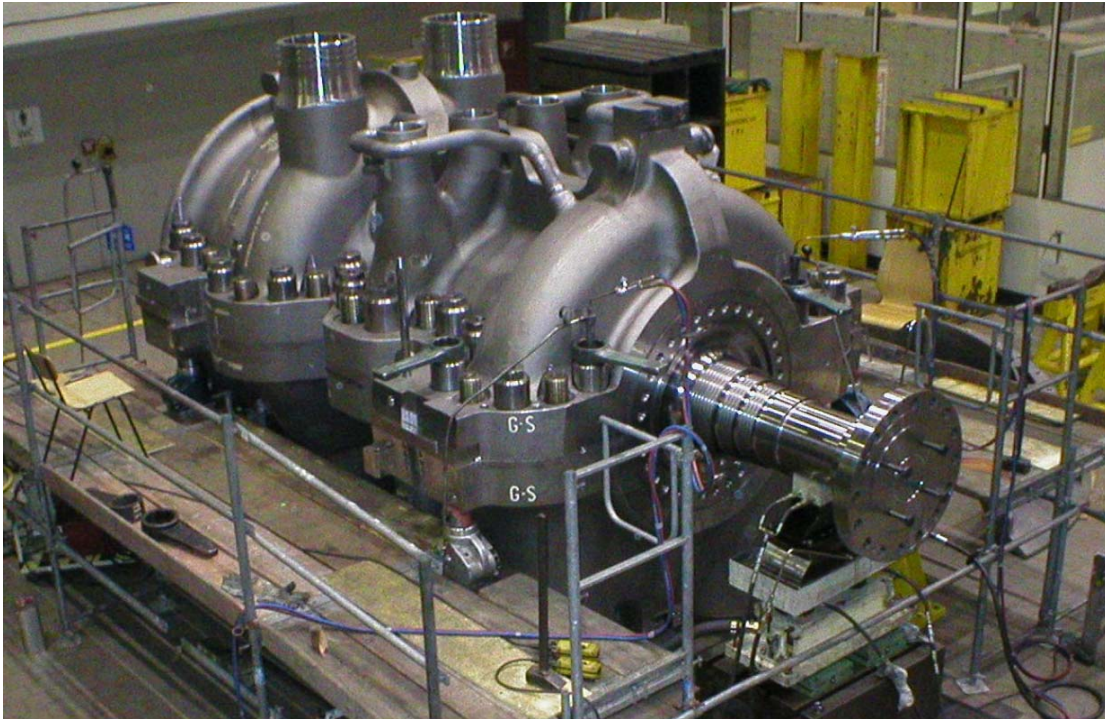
BB44FA Inner Casing & Rotor Assembled
